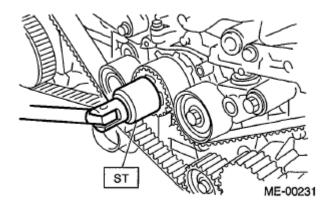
Locating Timing Belt Guide Bolts (4 Of 4) Courtesy of SUBARU OF AMERICA, INC.
